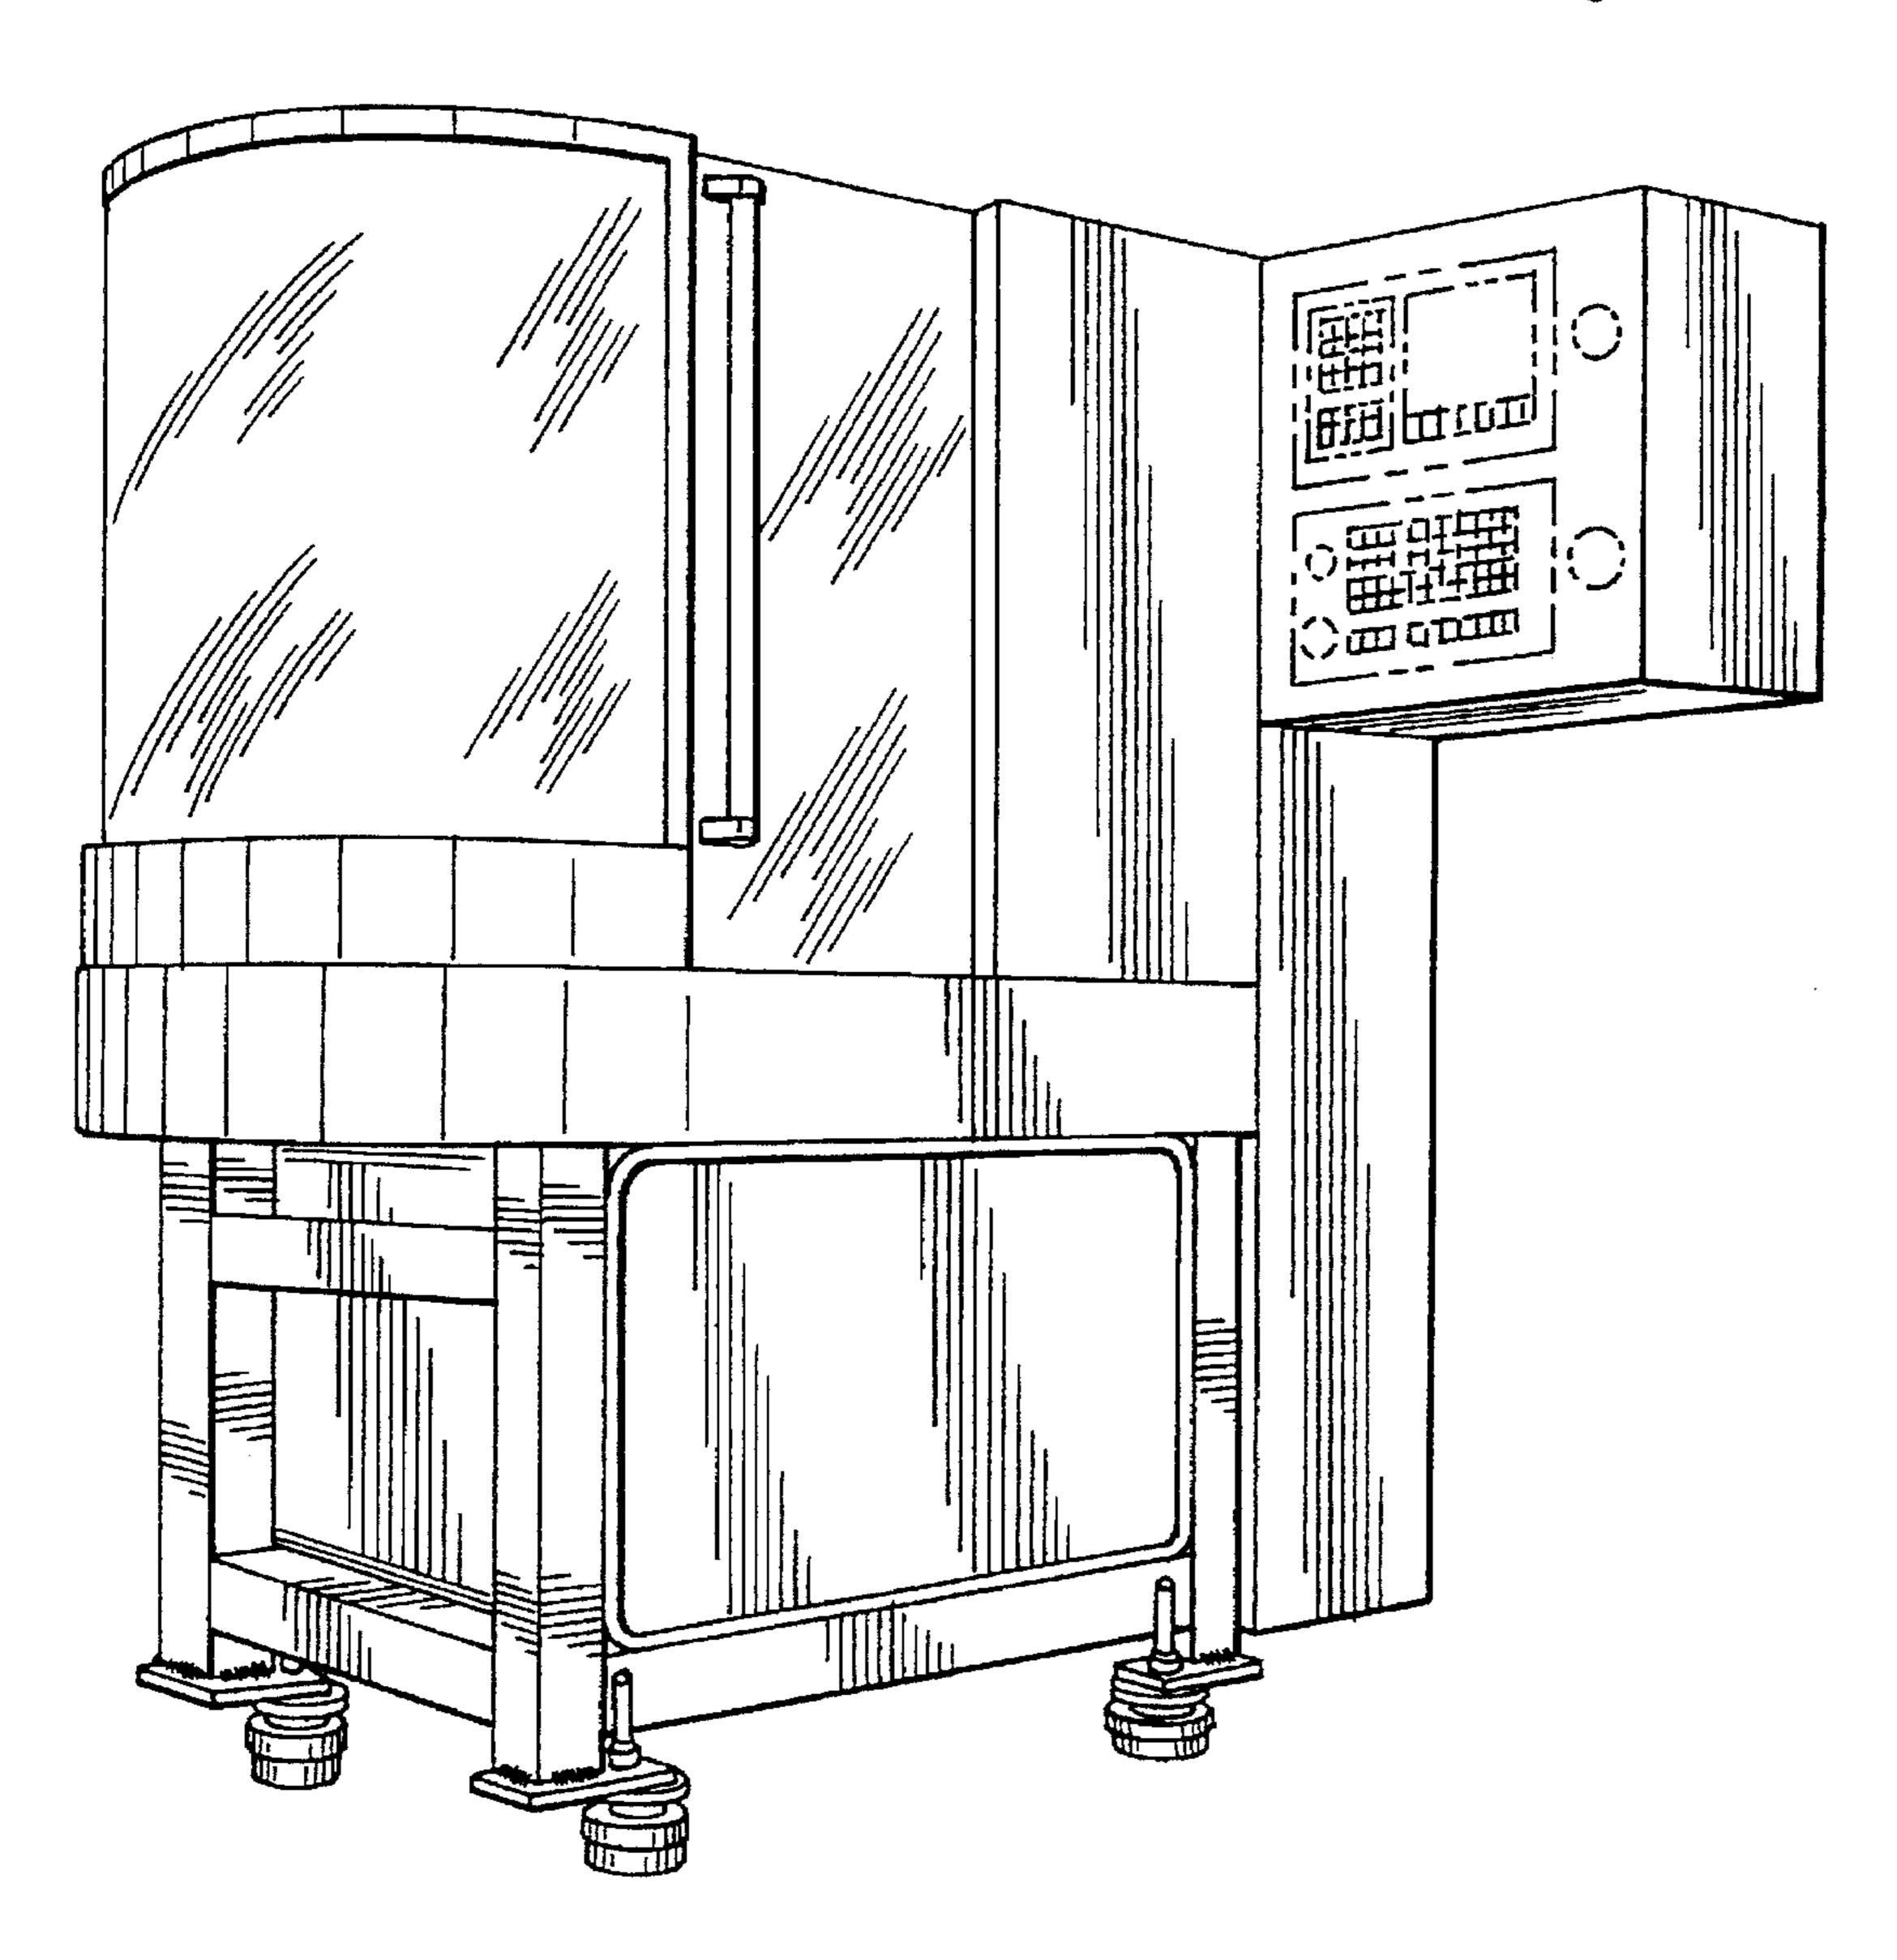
is a side elevational view of a computer numerical control operated tool grinder enclosure;
